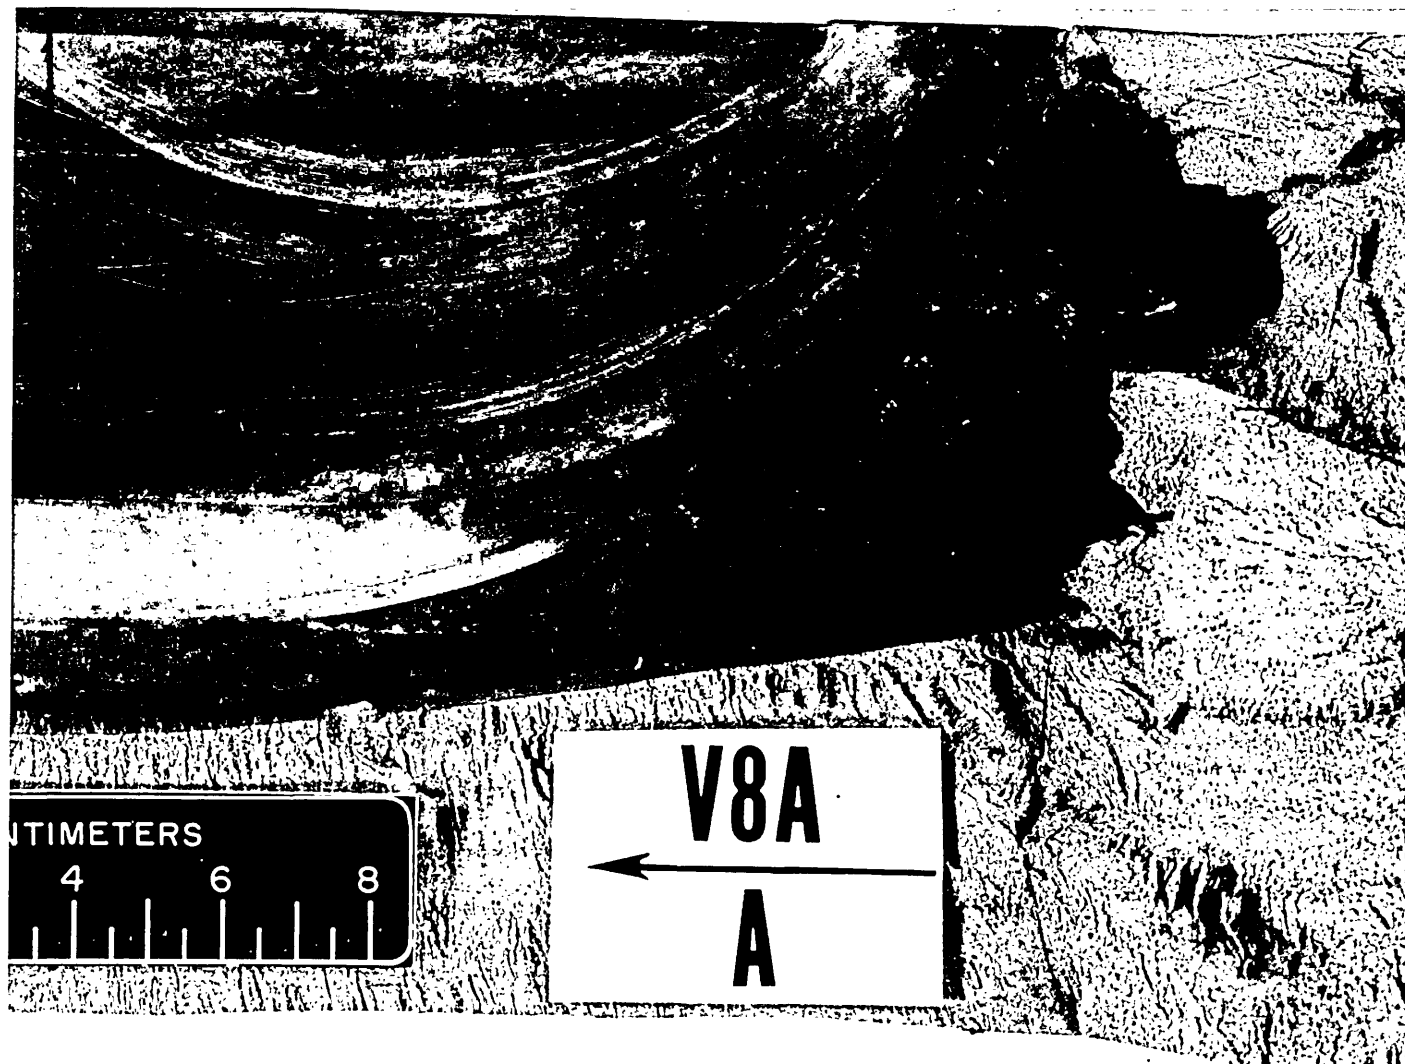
V8A-A fracture surface complementary to that shown in Fig. N.6.
